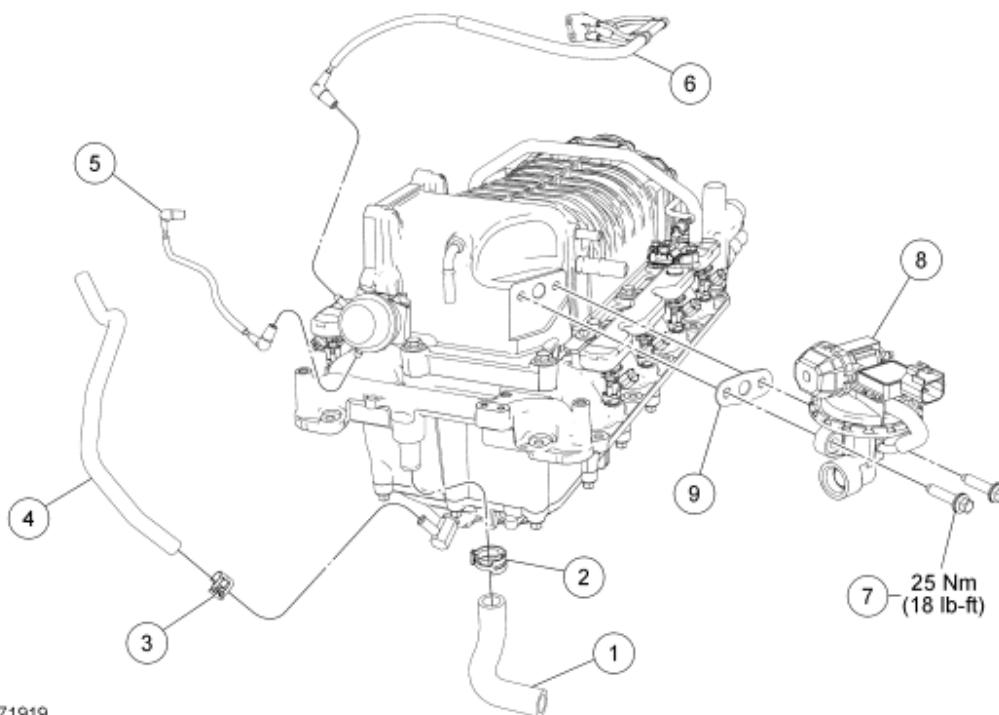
Exploded View Of Intake Manifold Assembly With Torque Specification (1 Of 3)
